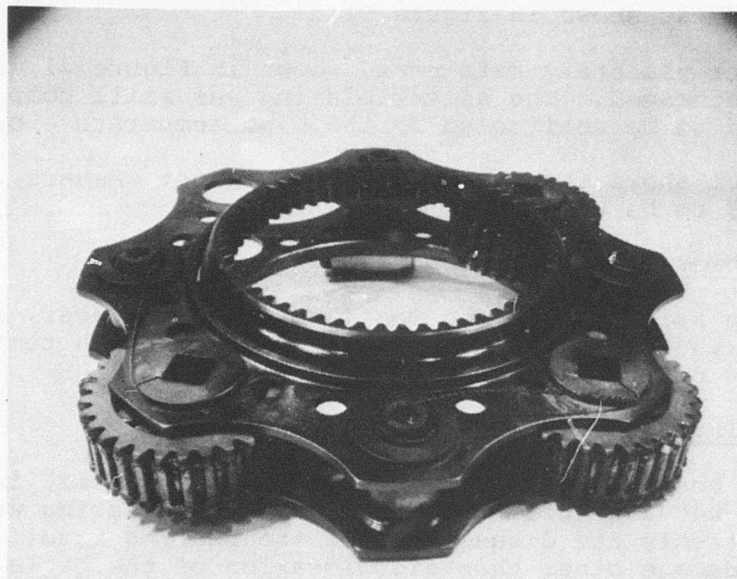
Lower planetary assembly following 4.0-hour emergency lubrication run.
